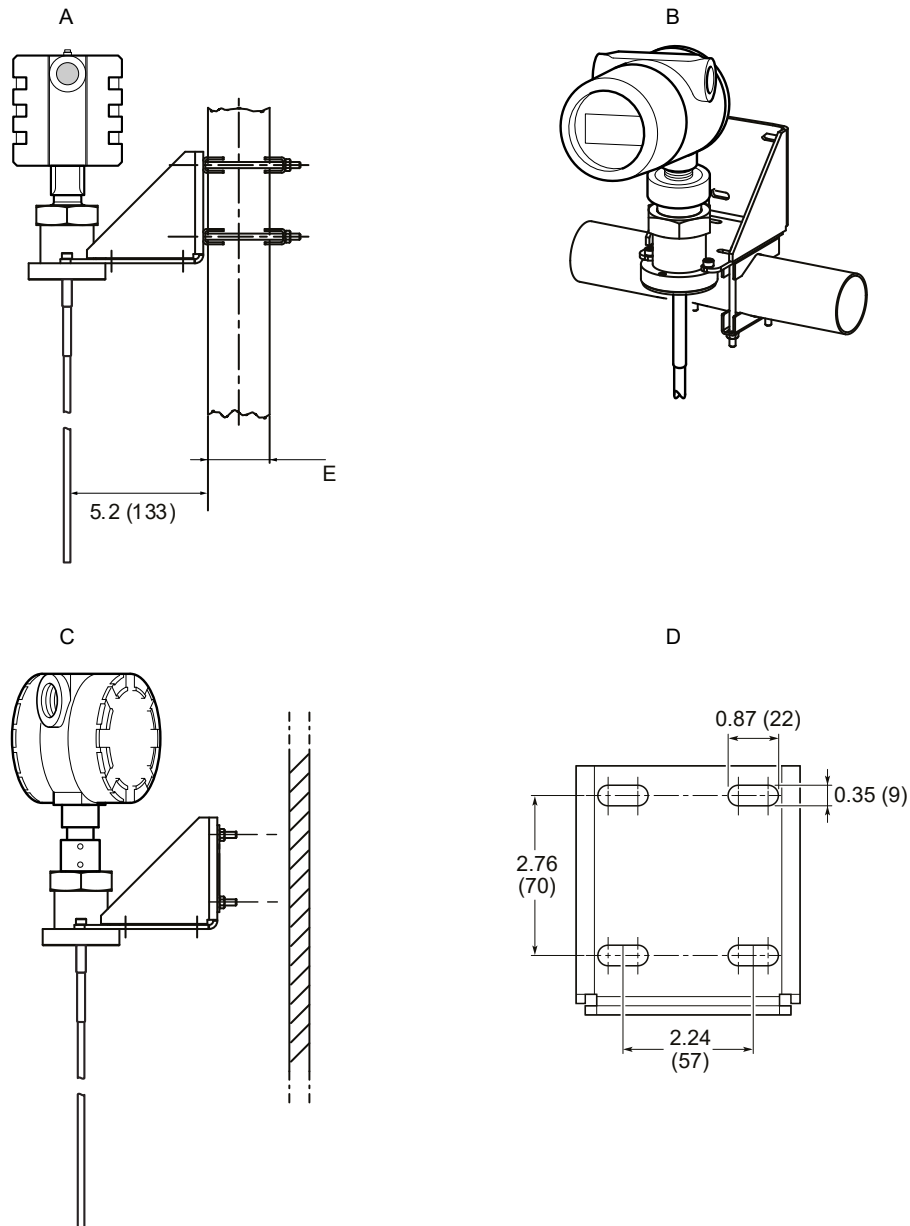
Flexible Twin Lead Probe with Threaded Connection
